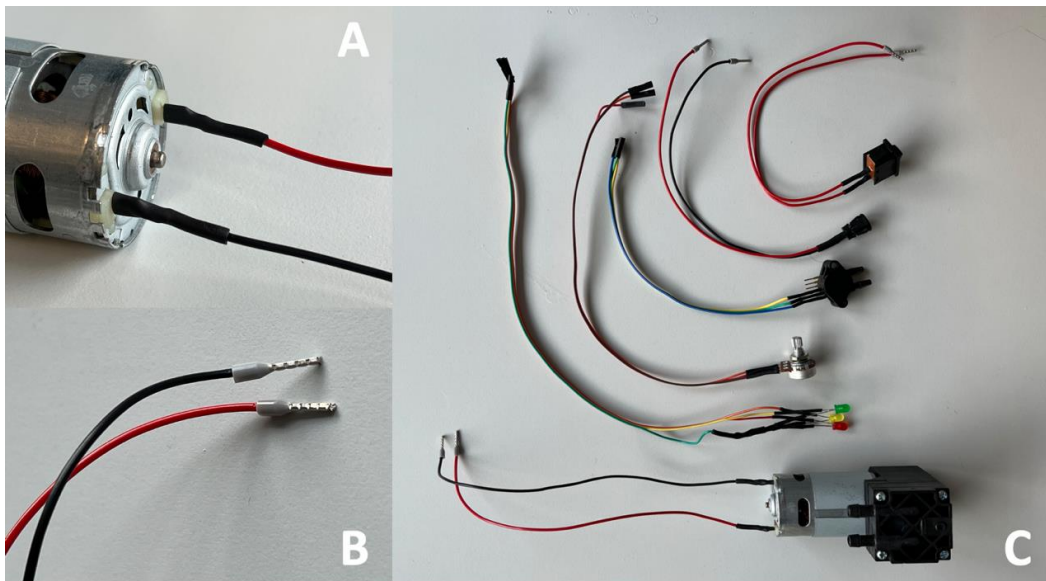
(A) Heat shrinks applied to protect solder. (B) Pin terminals connections.
